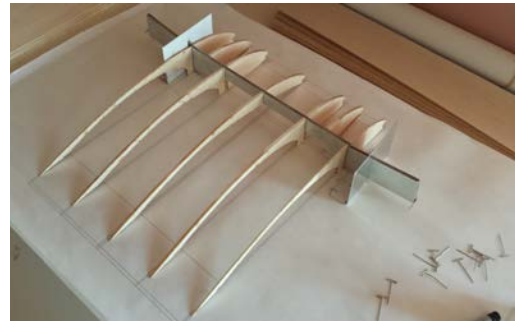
MS wing section under construction Figure 6.2.2: MS center section under construction
